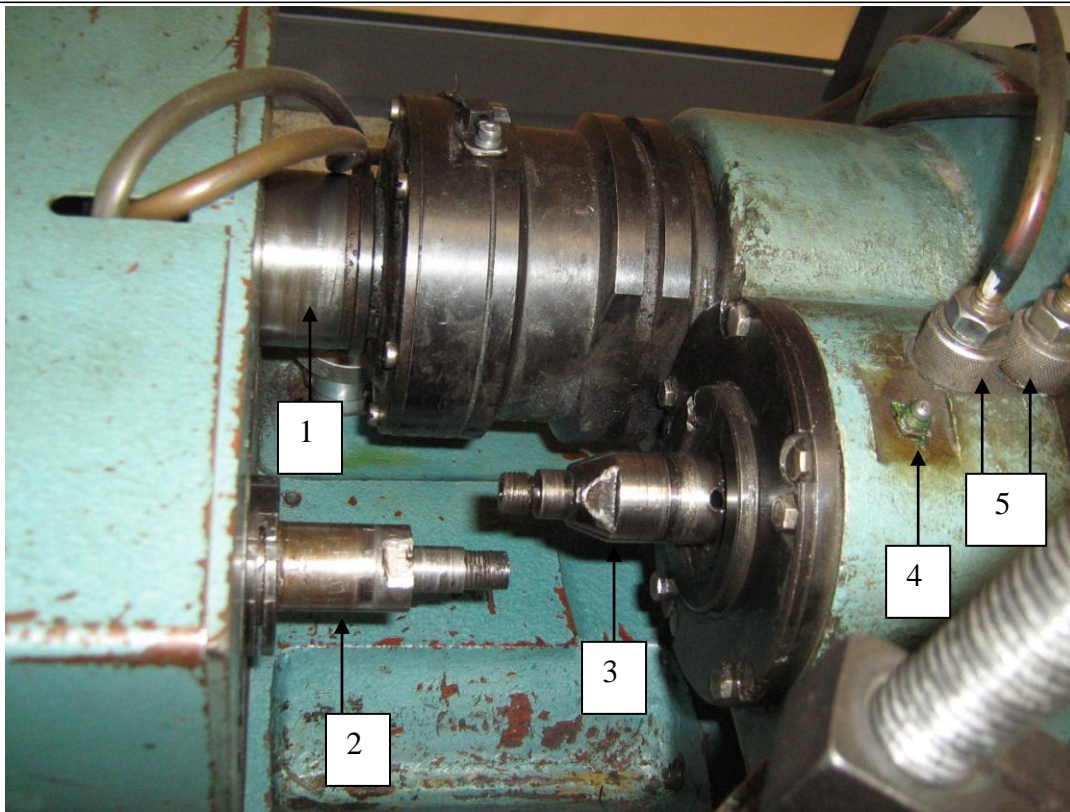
A view of the working chamber after removal of covers
